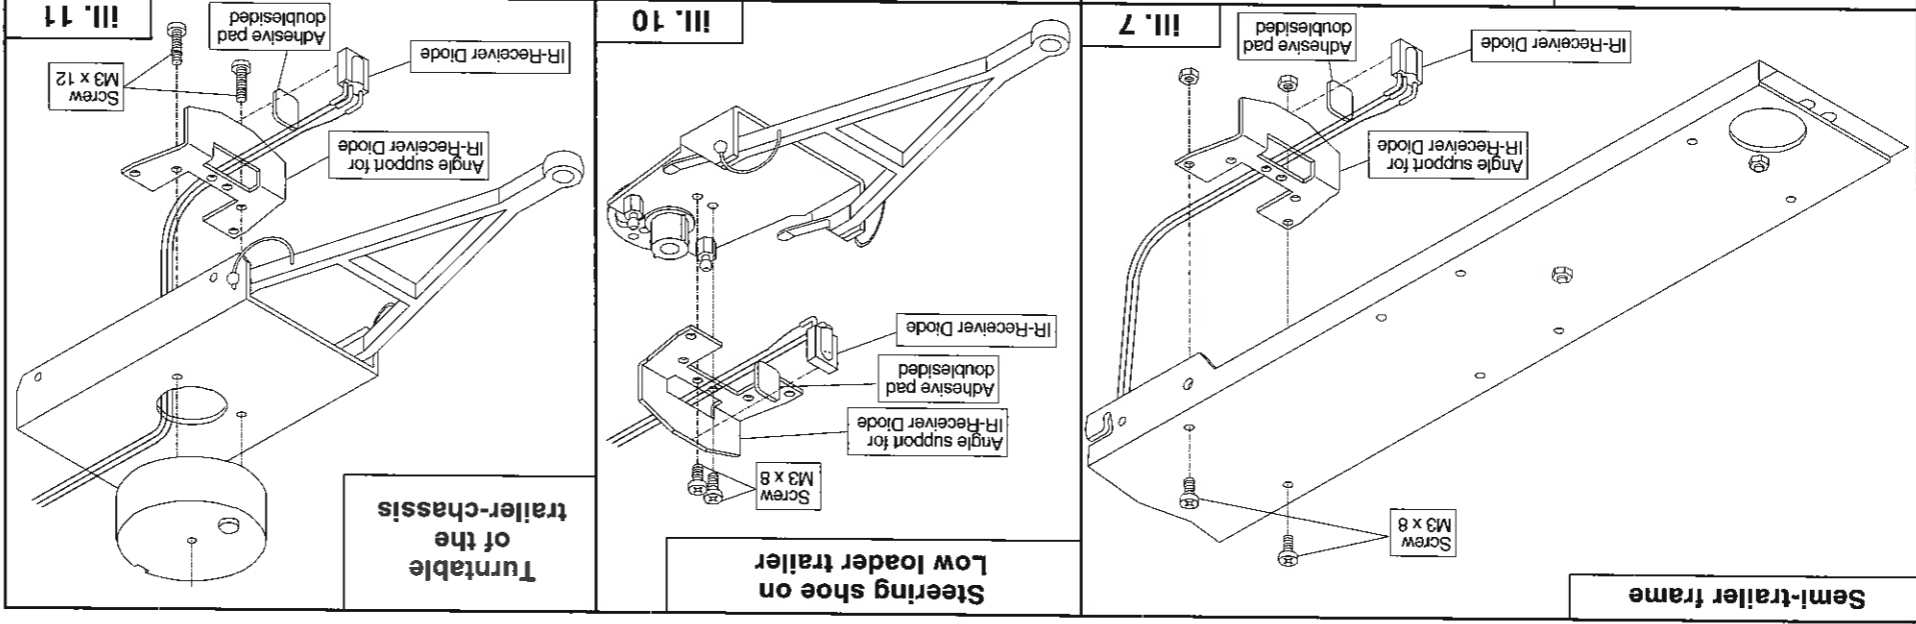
Attachment to the trailer chassis Art.-Nos. 371/372. Accordingly to the drawing fix the angle support onto the turntable. Lead the cable through the opening on the angle support and through the big hole on the turntable, underneath the chassis frame, beside the battery box rearwards to the control and lighting board.
